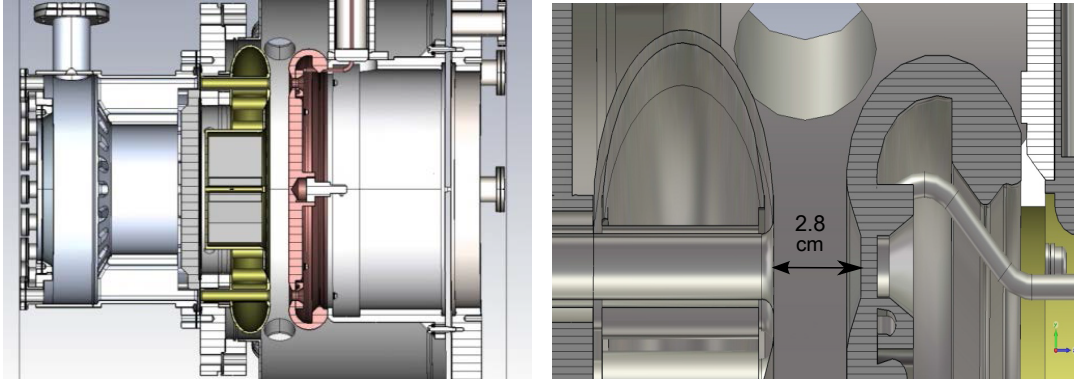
Left: The high voltage vessel with the ceramic on top. Right: Cross sectional view of the cathode shroud.
